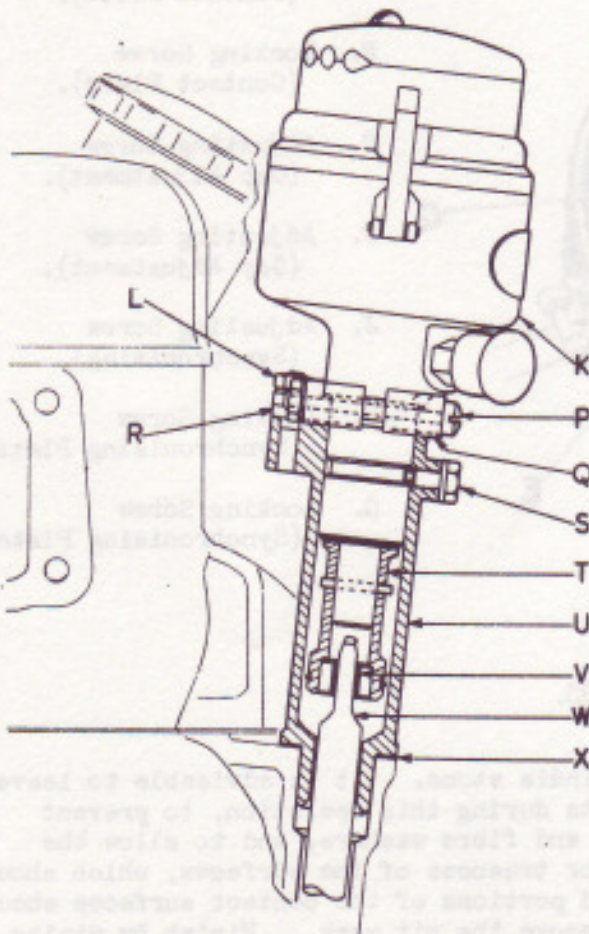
DISTRIBUTOR AND HOUSING IN POSITION.
